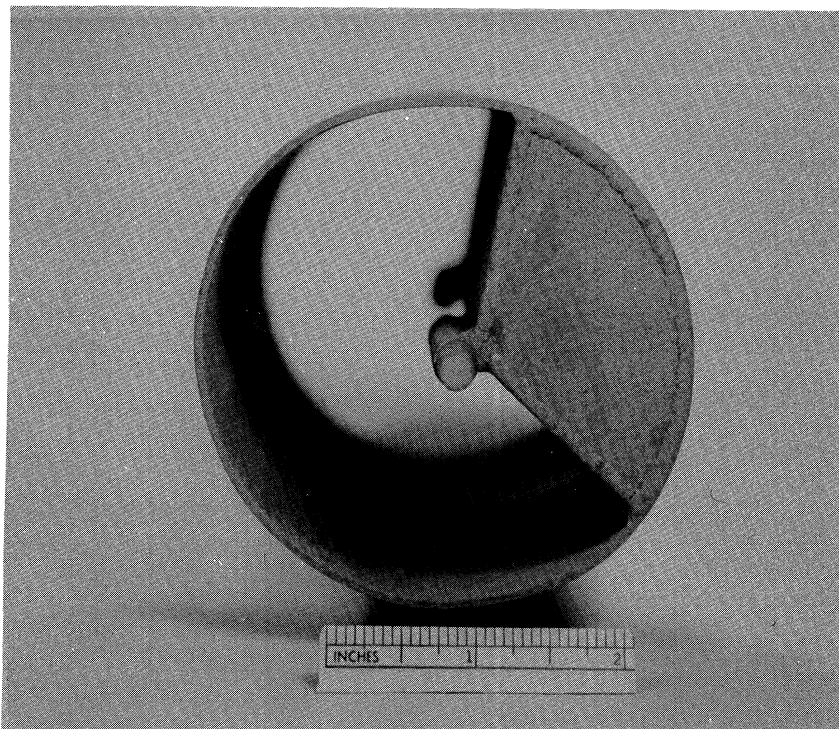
WAD reactor inner core—end view showing heat distortion after 97-1/2 hours testing.
